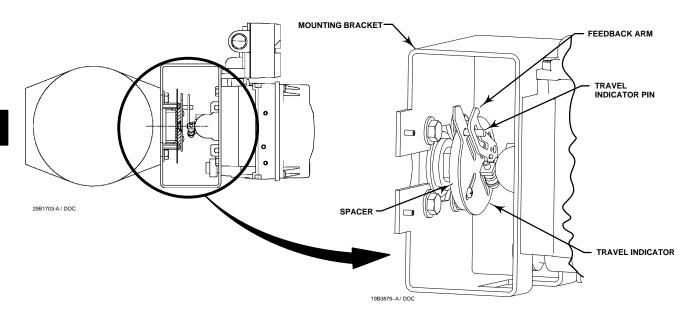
Mounting a FIELDVUE DVC6030 SIS Digital Valve Controller on a Rotary Actuator (1032 Size 425A Shown)
